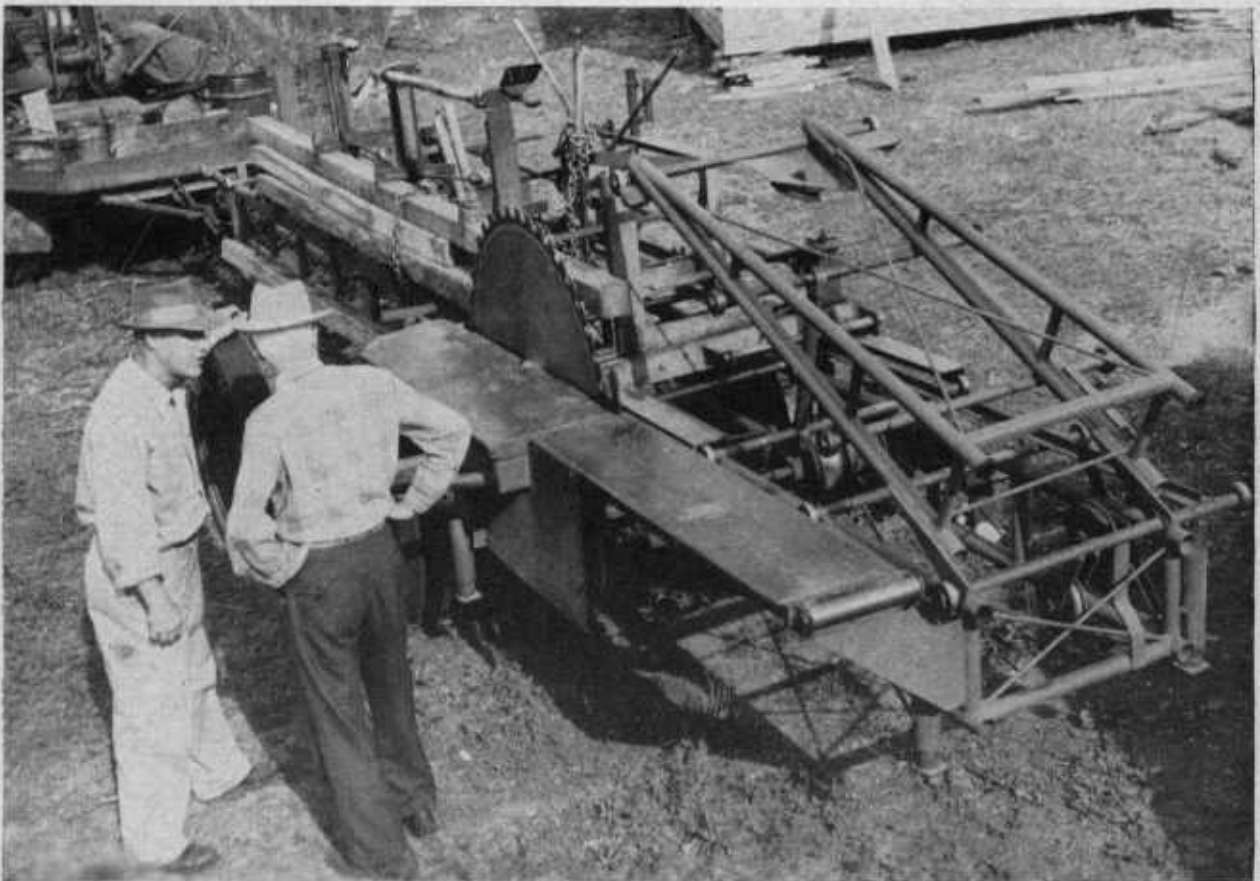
Single-circular mill, wheel-mounted. Sawyer rides the carriage.
